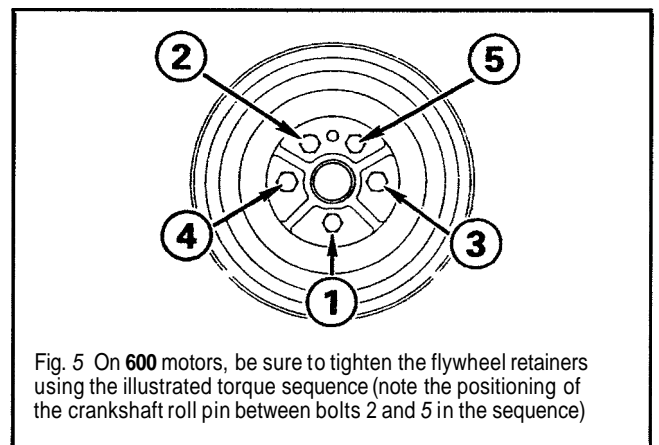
On 600 motors, be sure to tighten the flywheel retainers using the illustrated torque sequence (note the positioning of the crankshaft roll pin between bolts 2 and 5 in the sequence)
